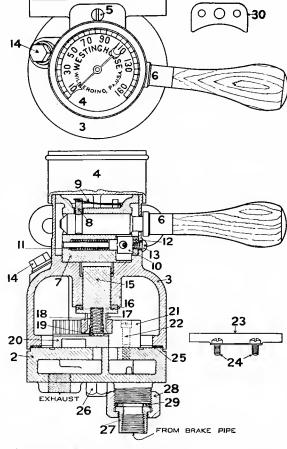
Motorman's Straight Air Brake Valve, Type SQ.
